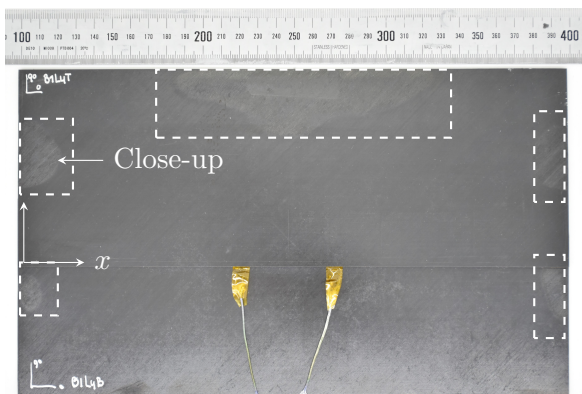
Photographs of the reference weld (B1L1) taken for visual inspection. The other assemblies are shown in Appendix B.
